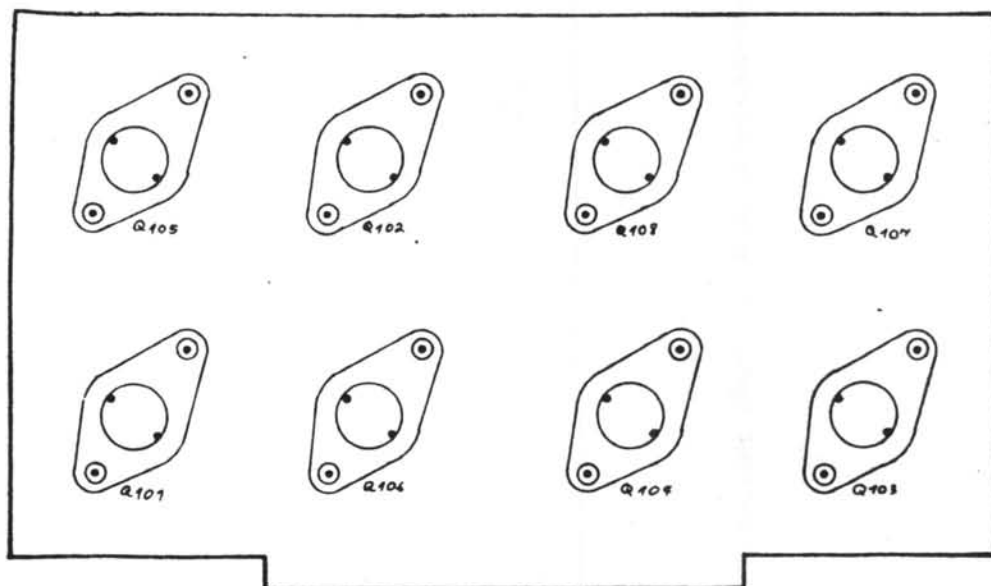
Bypass transistor card (AS:10) ; Components lay out
